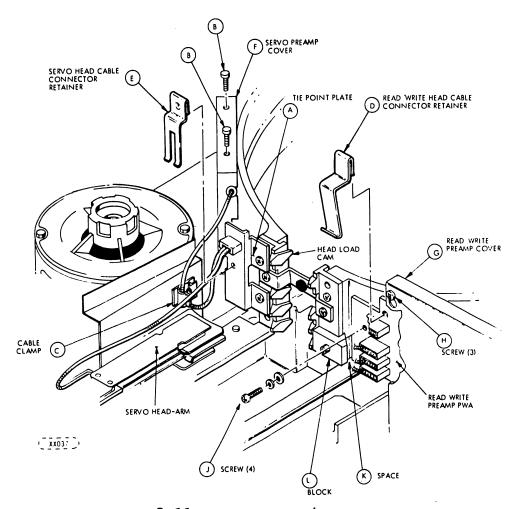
SERVO HEAD/ARM ASSEMBLY
